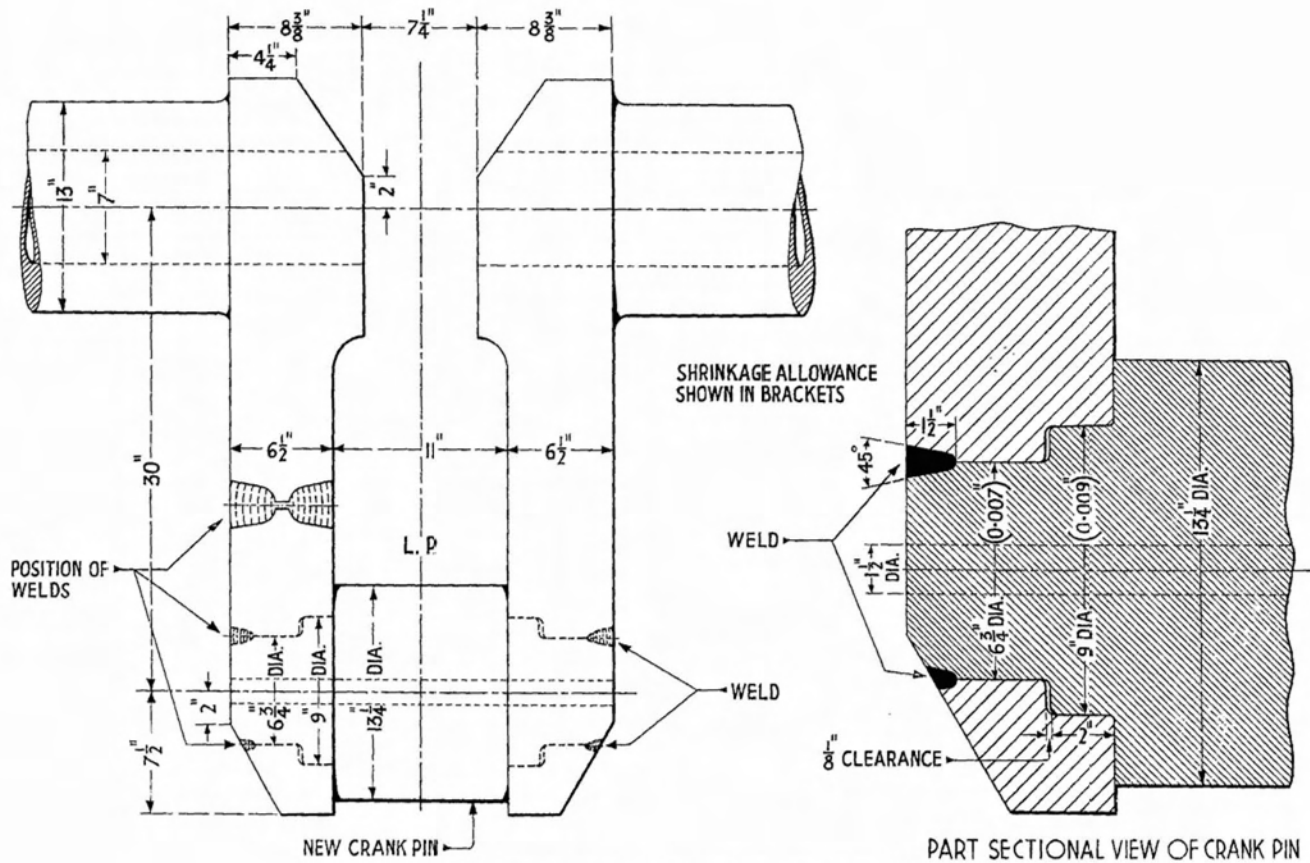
DETAILS OF NEW CRANK PIN FOR SHAFT OF "FIRM"
